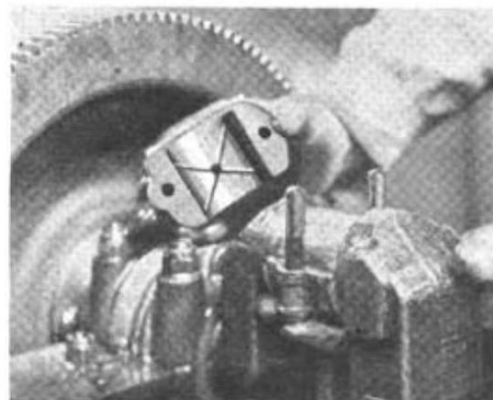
In Removing Connecting Rod Caps Hold Rod and Bolts as Shown and Keep Shims in Place
